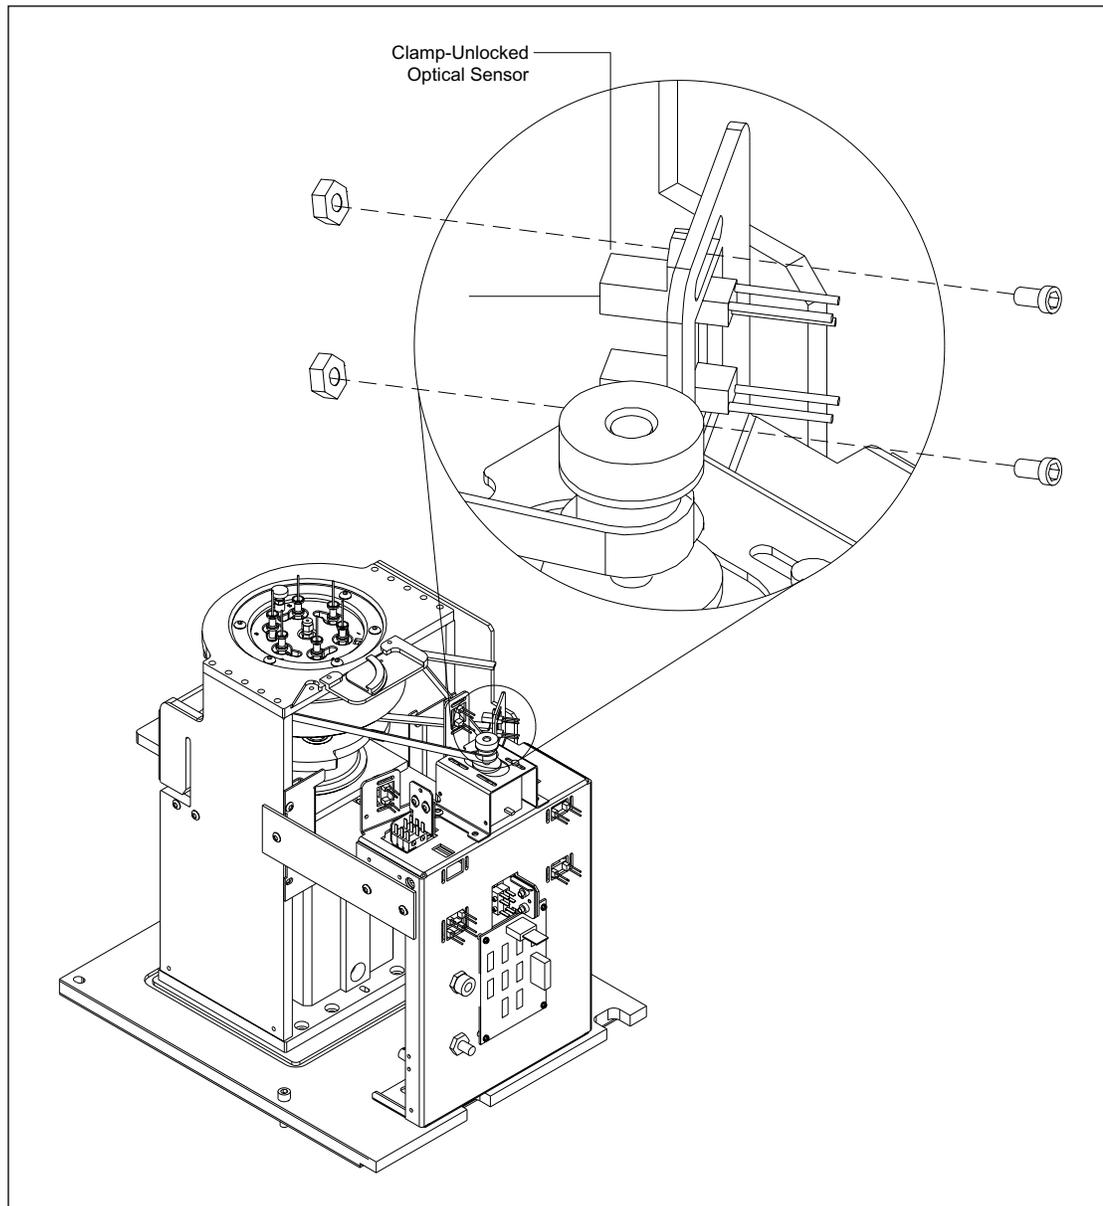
Anode Cover Clamp-Unlocked Optical Sensor Mounting.
